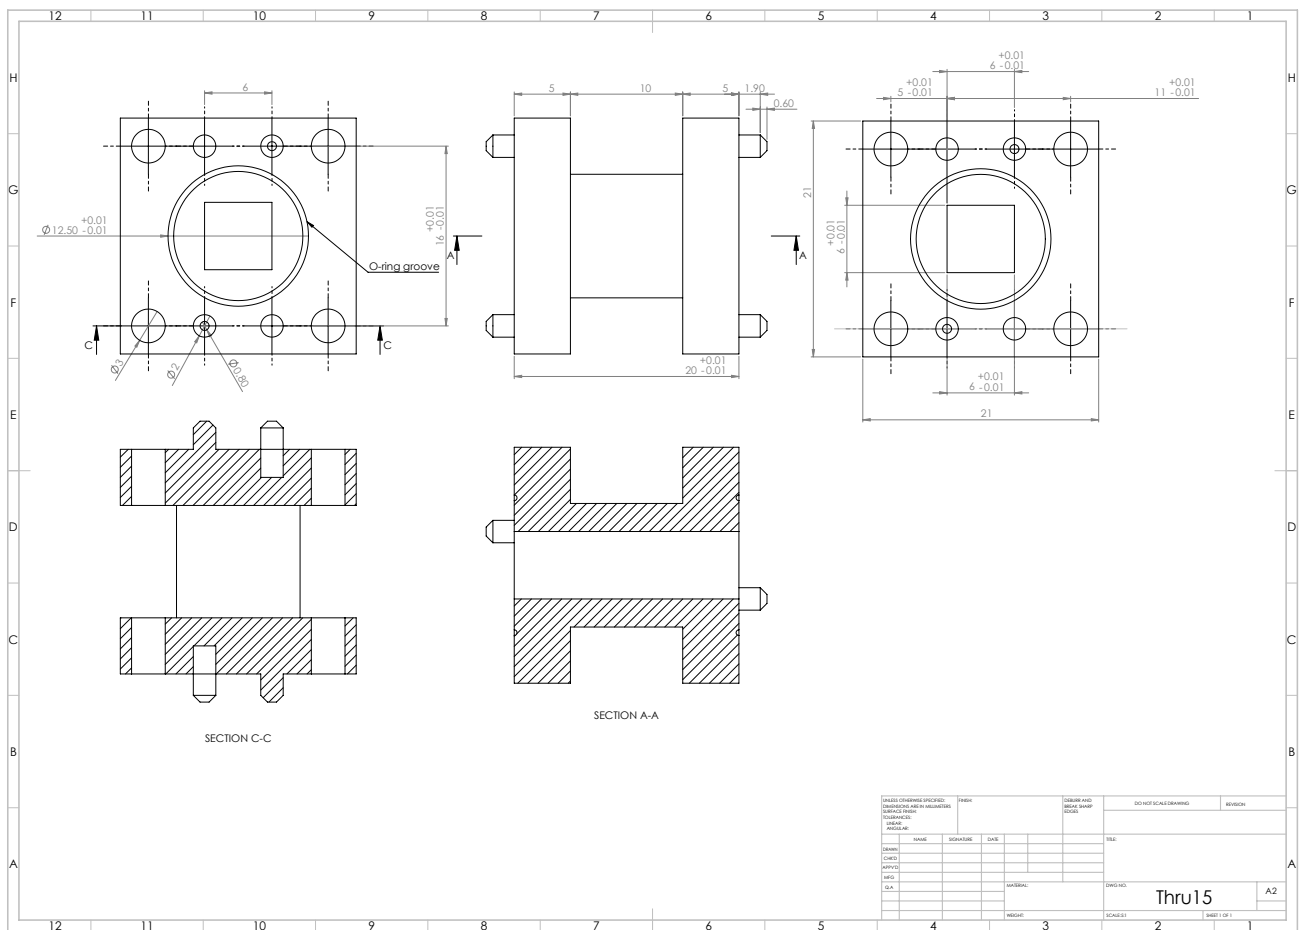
Solidworks technical drawing of a proposed Thru to be 3D printed for calibrating the dual port system.
